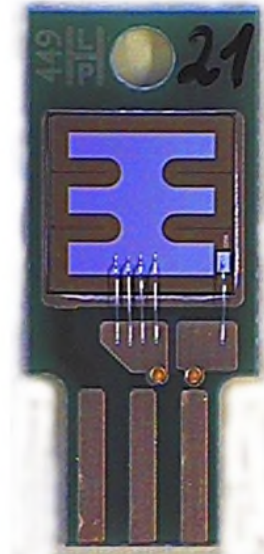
Die mounted on PCB for TID testing – soldered and wire-bonded
